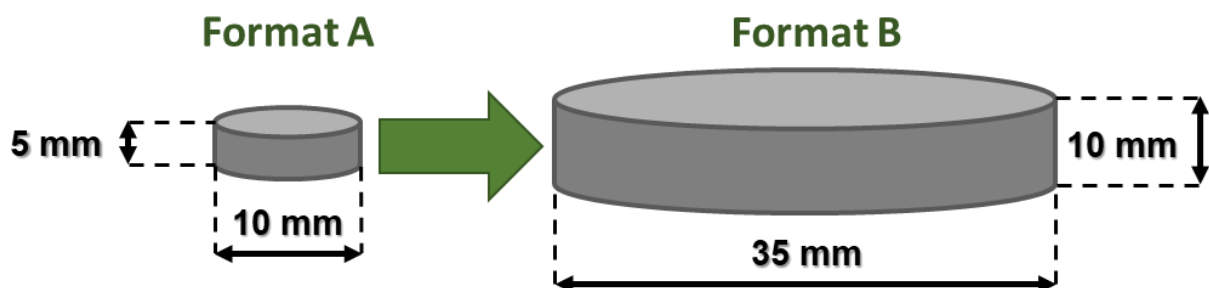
Sintered shape and dimensions of the two formats to test scale-up in pressure-less sintering.
